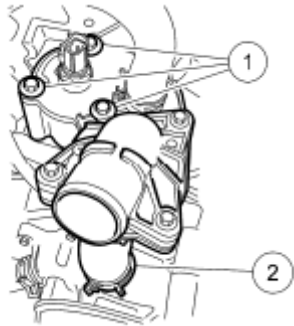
Identifying Bypass Hose Clamp And Bolts
